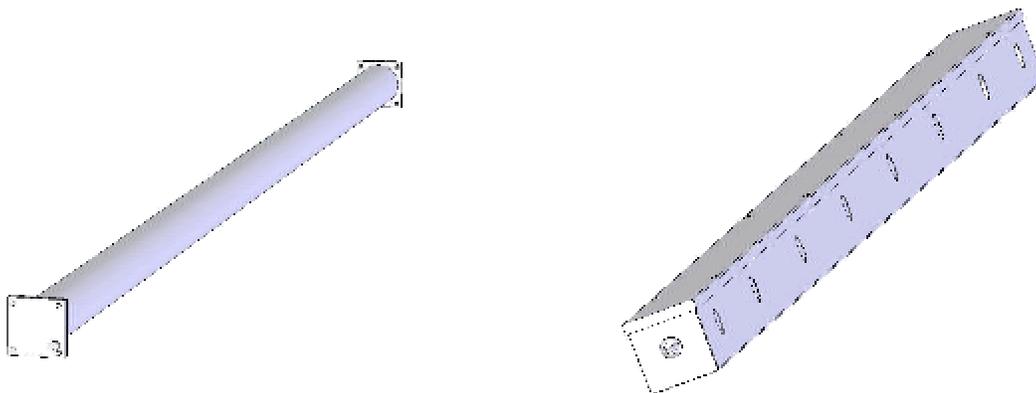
Rod Pipe (left) and Rod Box (right)
